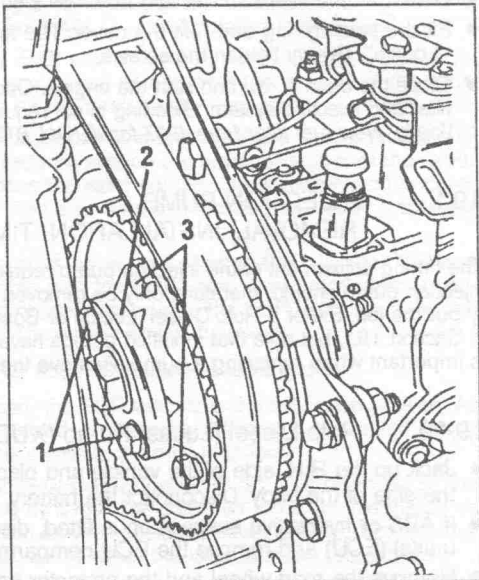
View of the injection pump drive gear, showing the flange securing bolts (1), the drive gear extracting flange (2) and the two arrester bolts (3) for the drive gear (M8 x 1.25 thread).
